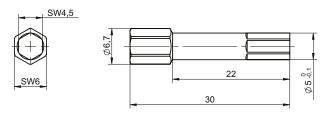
Mounting tool Type 1300A167 Type 1193A
